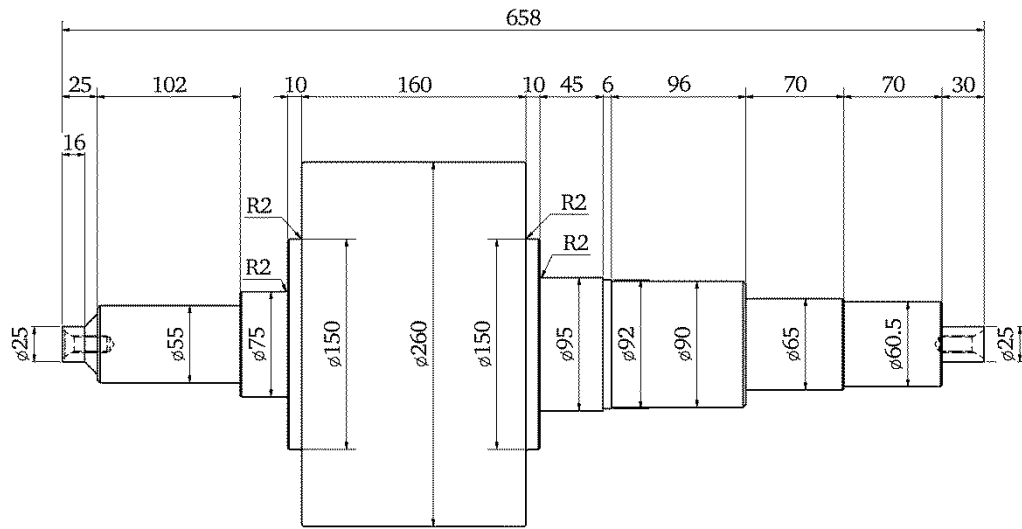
Dimensions (unit: mm) of the rotor for hardening
